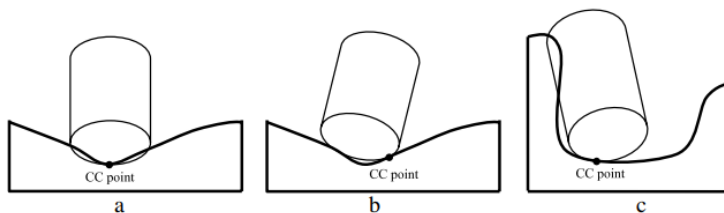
Three types of gouging in 5-axis machining. (a) Local gouging. (b) Rear gouging. (c) Global gouging (collision).
